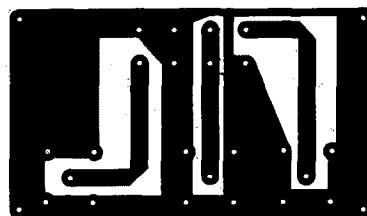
Full-size printed-circuit board for dual-inline packaged double-balanced mixer modules.
